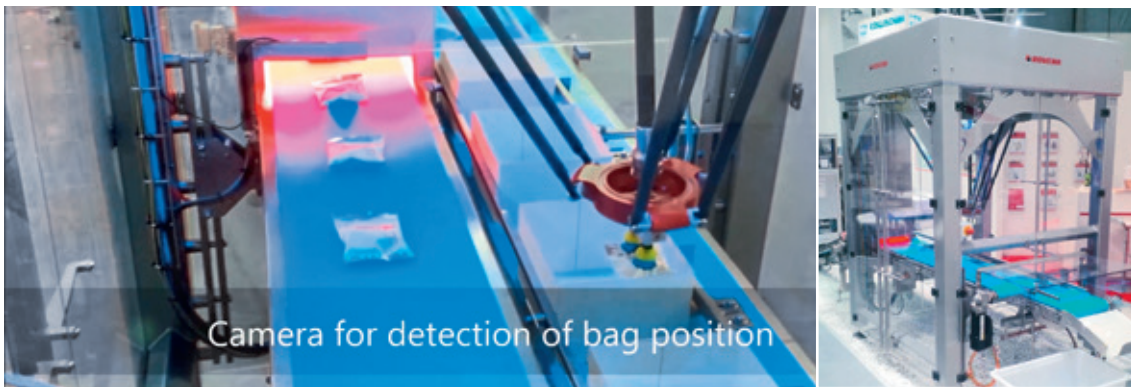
Rovema develops new pick-and-place robot with built-in Vision & Control machine vision components.
